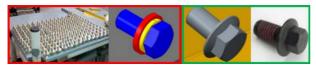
Preassembly of bolt set and replacement by flange bolt with locking patch.
